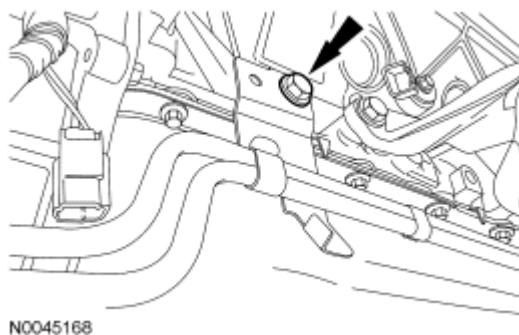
Locating Transmission Cooler Line Bracket Bolt
